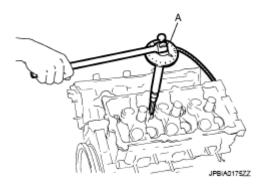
Checking Cylinder Head Bolt Tightening Angle Using Angle Wrench Courtesy of NISSAN MOTOR CO., U.S.A.
